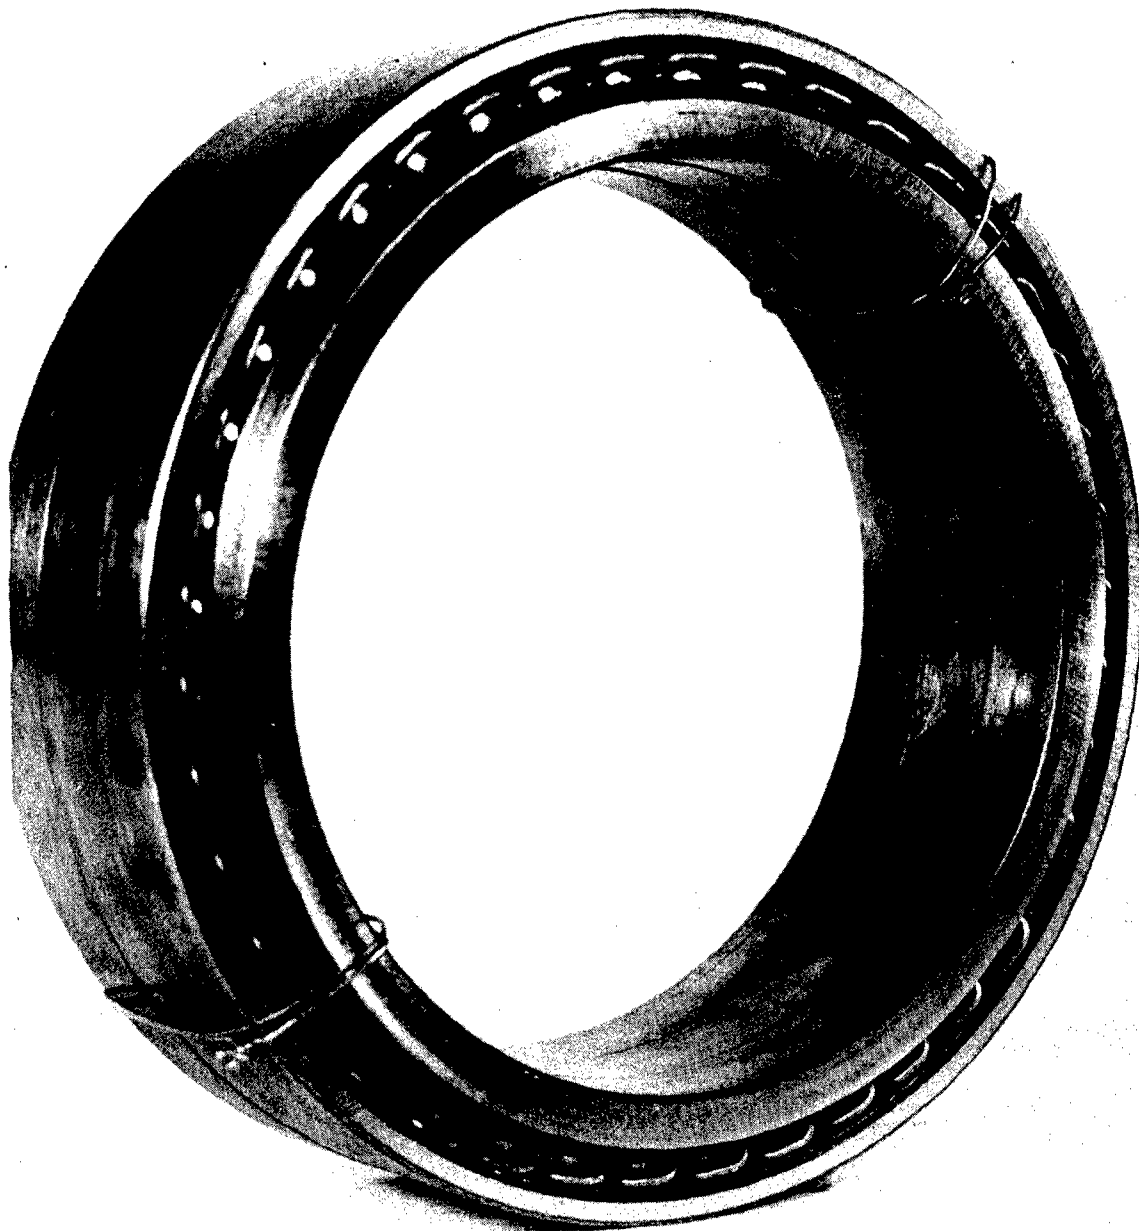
Front View Galled Blade Bearings. Aeroproducts A422-69
